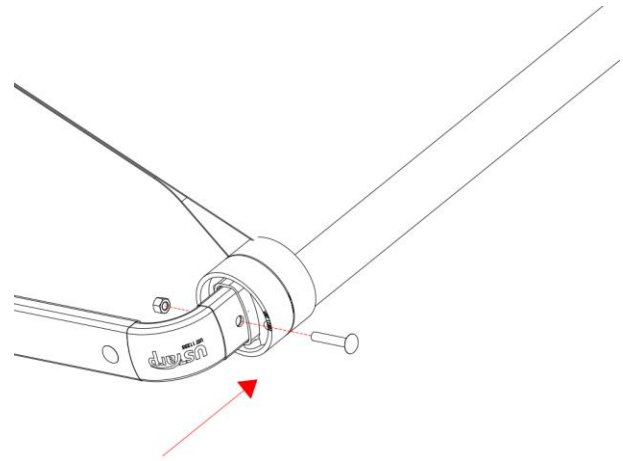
CONNECT ARMS AND CROSS TUBE
